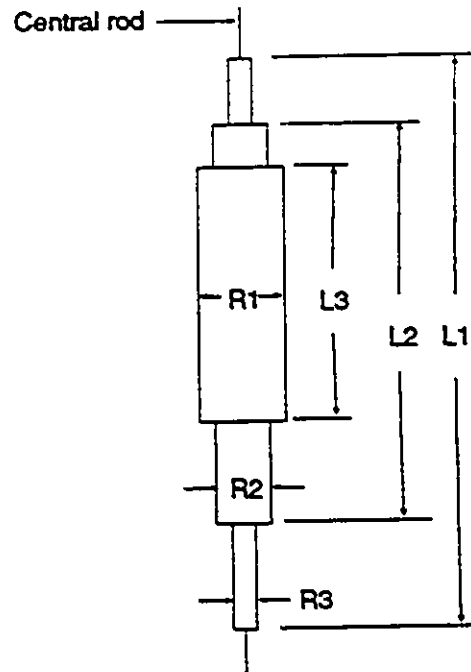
Design of the heavemeters (see Table 5.1 for details).
